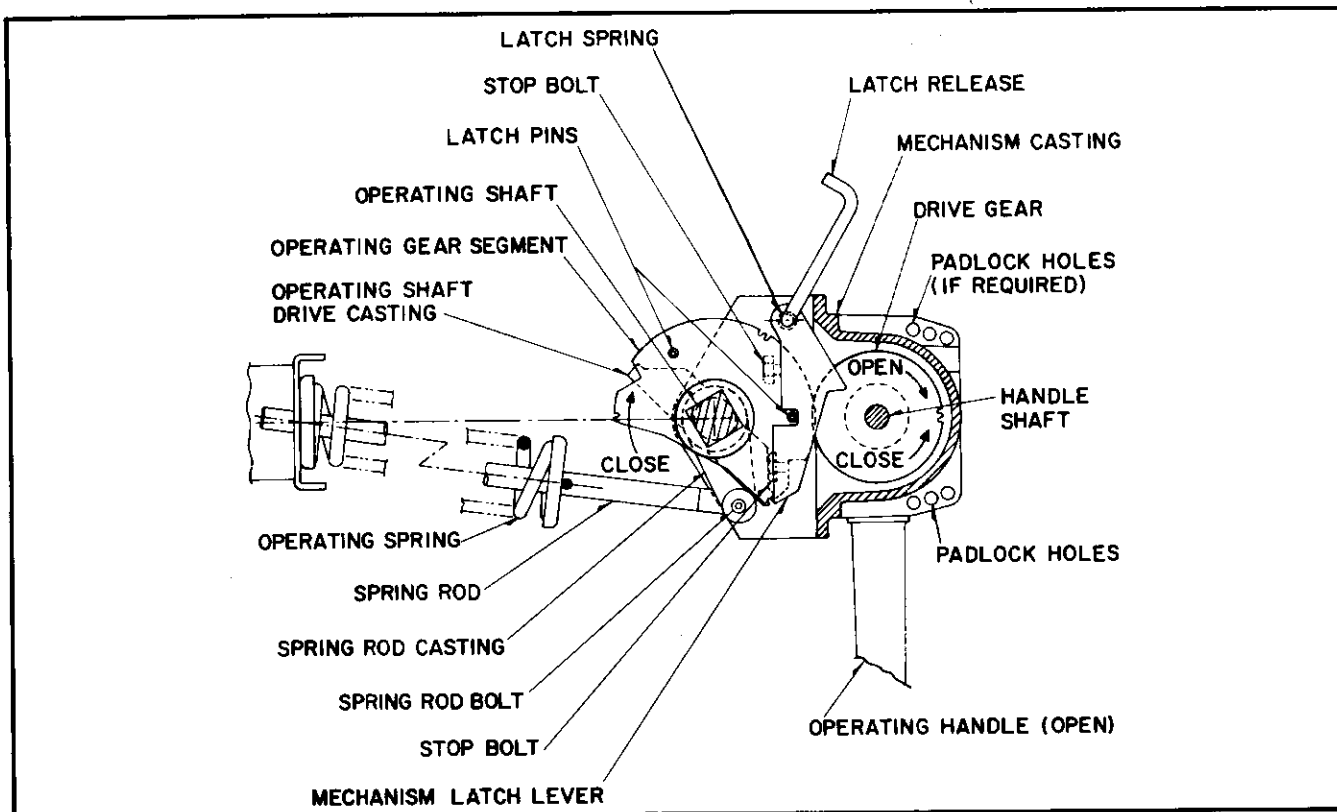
Operating Mechanism In The OPEN Position (Dwg. 3497C95)
